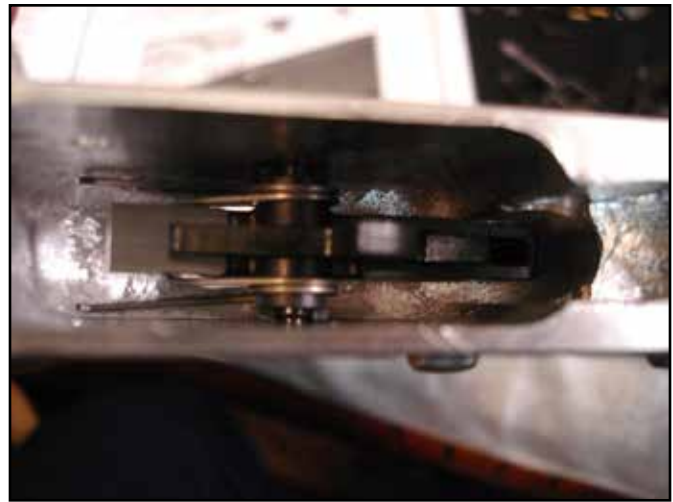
Trigger assembly and disconnecter placed into slot of receiver.
